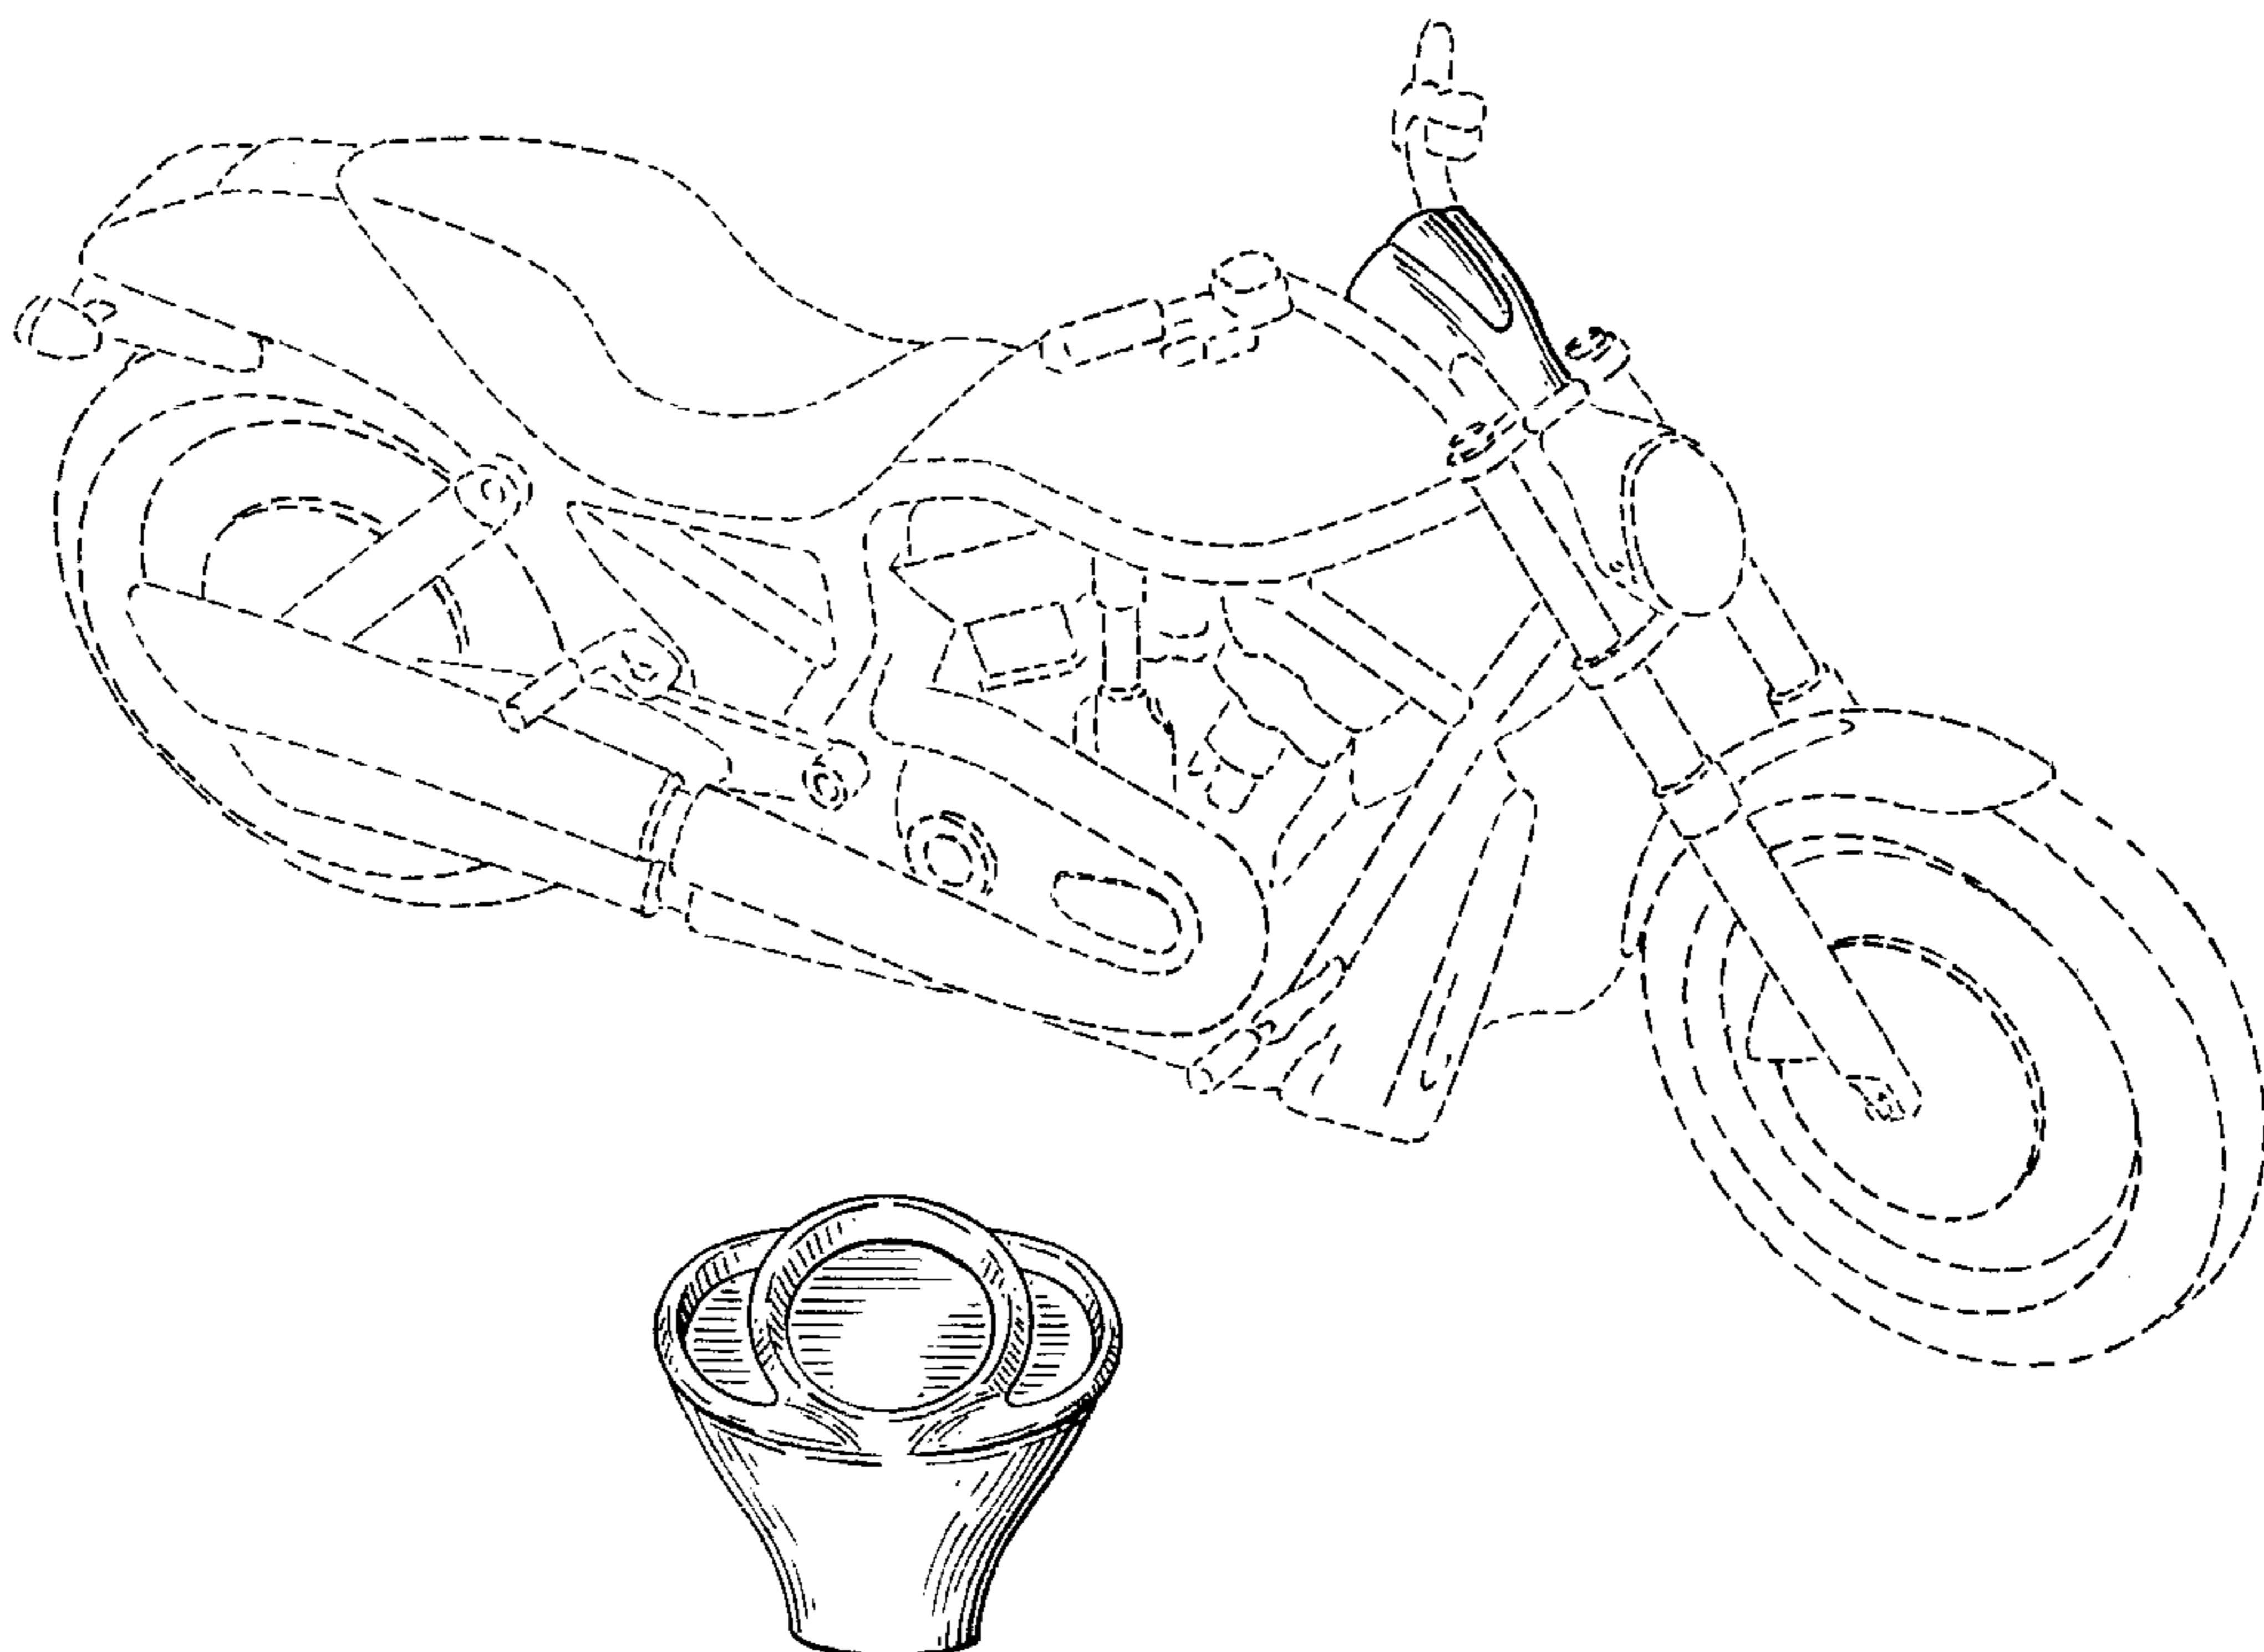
is an enlarged rear view of the motorcycle instrument cover shown in FIG. 1.
